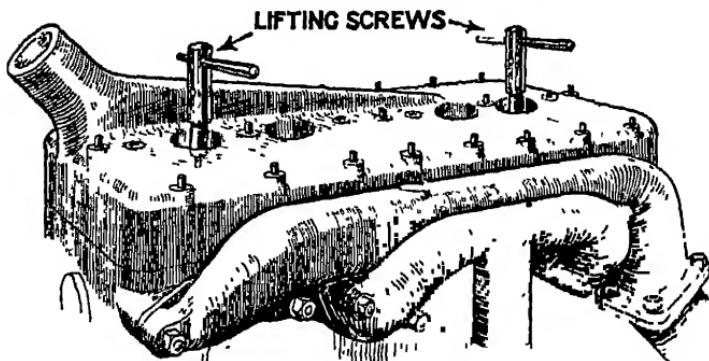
LIFTING DETACHABLE CYLINDER HEAD.
